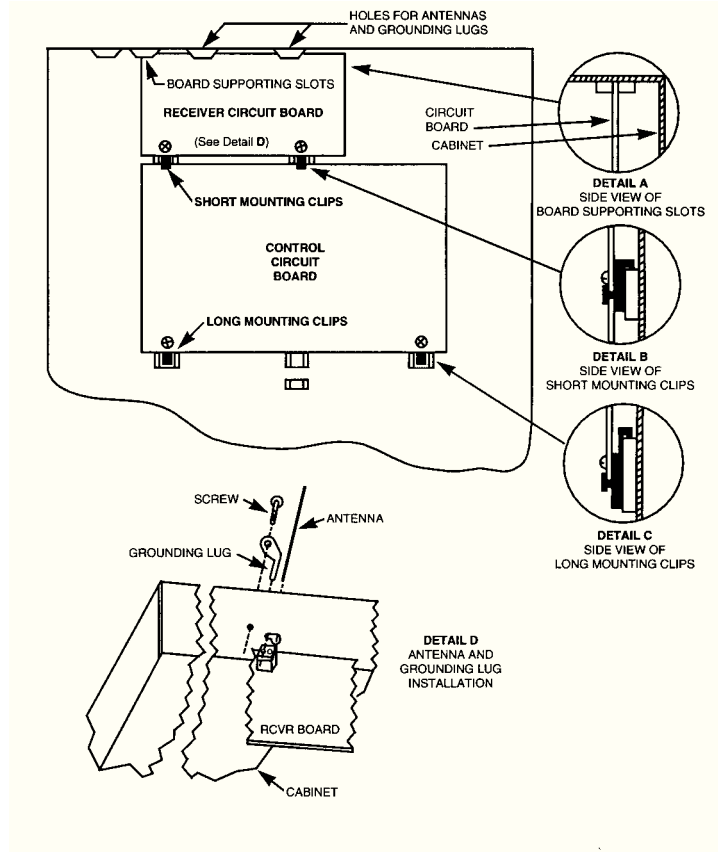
Mounting The PC Board And RF Receiver Together In The Cabinet
